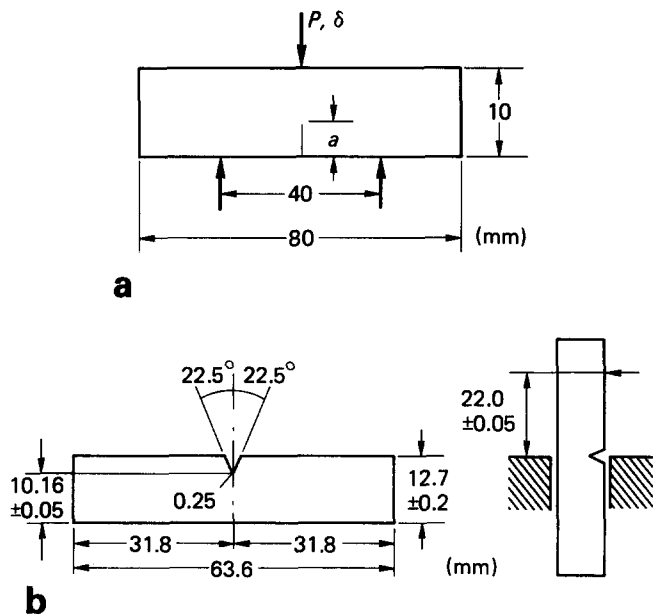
Specimen geometry: (a) three-point bend test; (b) Izod impact test
